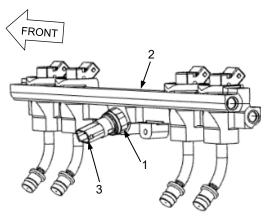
Driver side Fuel Rail (2) shown off Engine detailing FPT Sensor (1) and FPT Sensor Electrical Connector (3)
